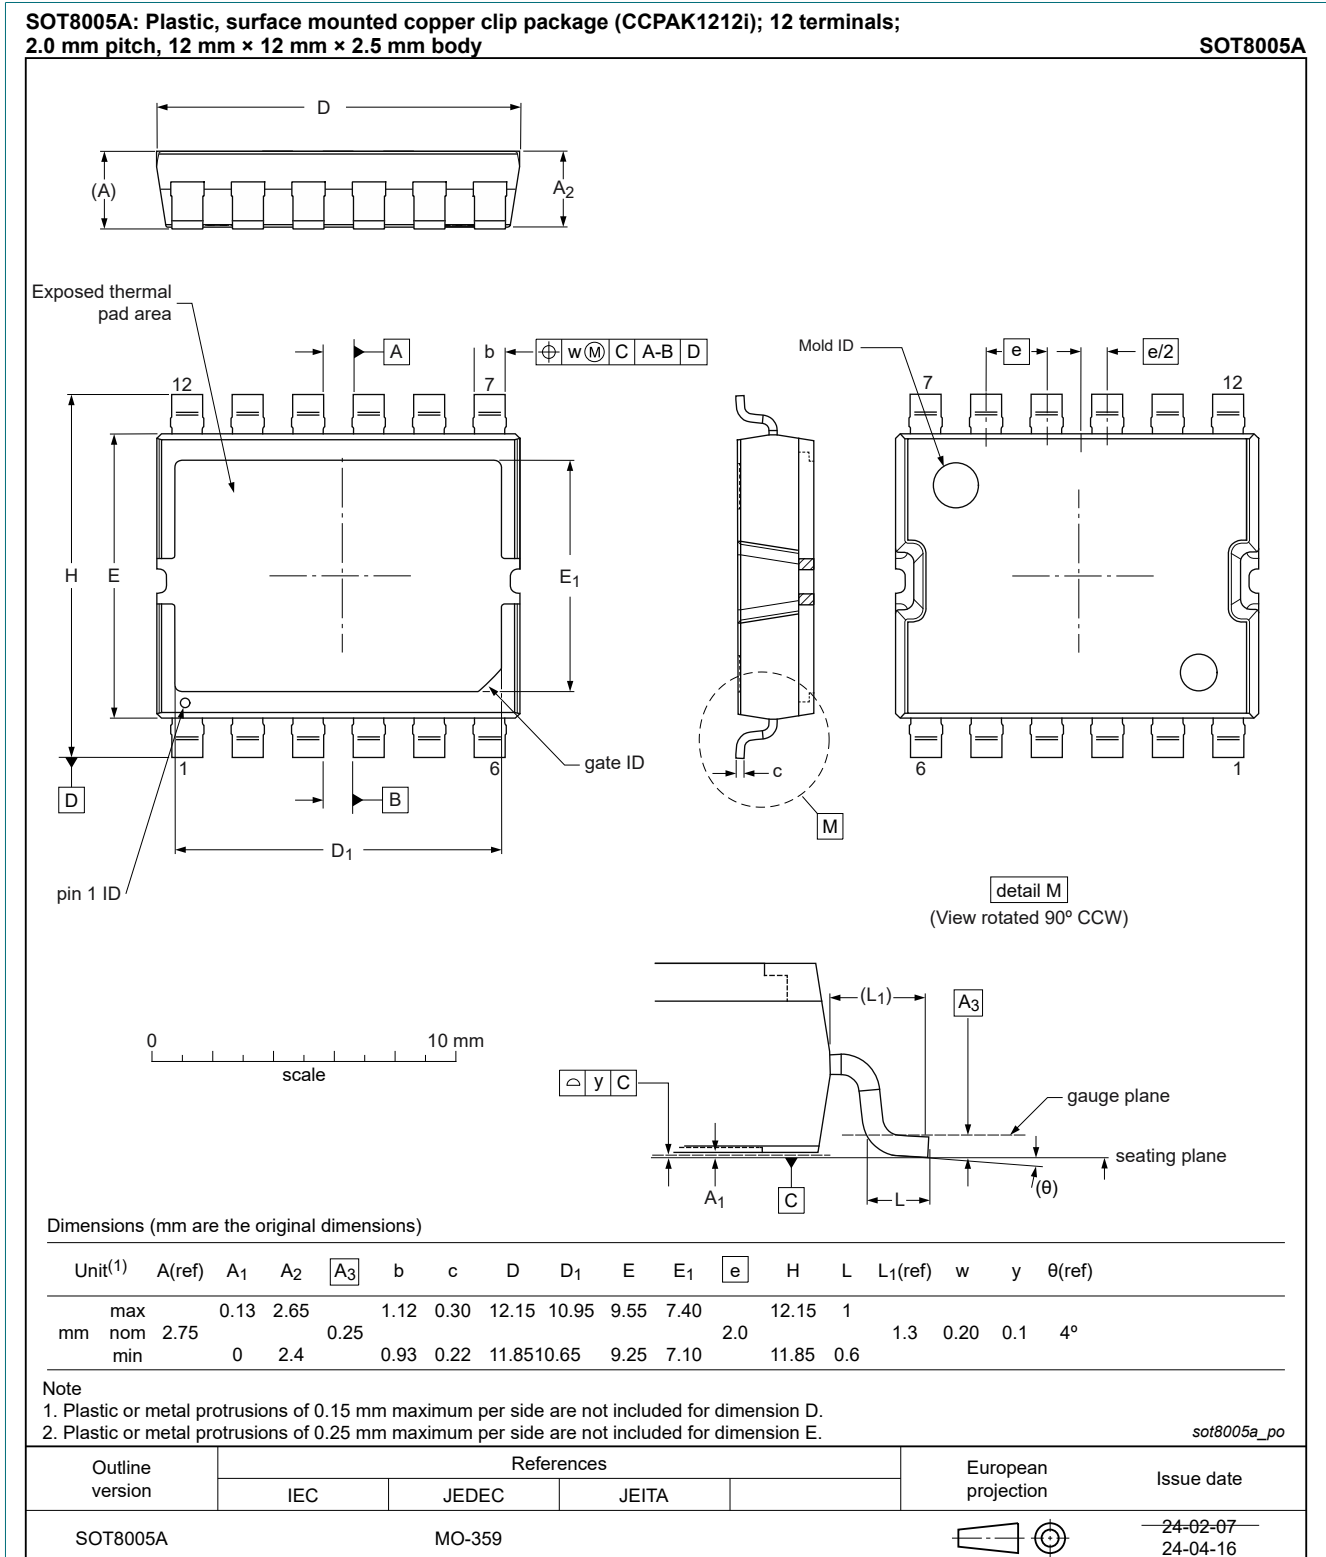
Package outline CCPAK1212i (SOT8005A)
